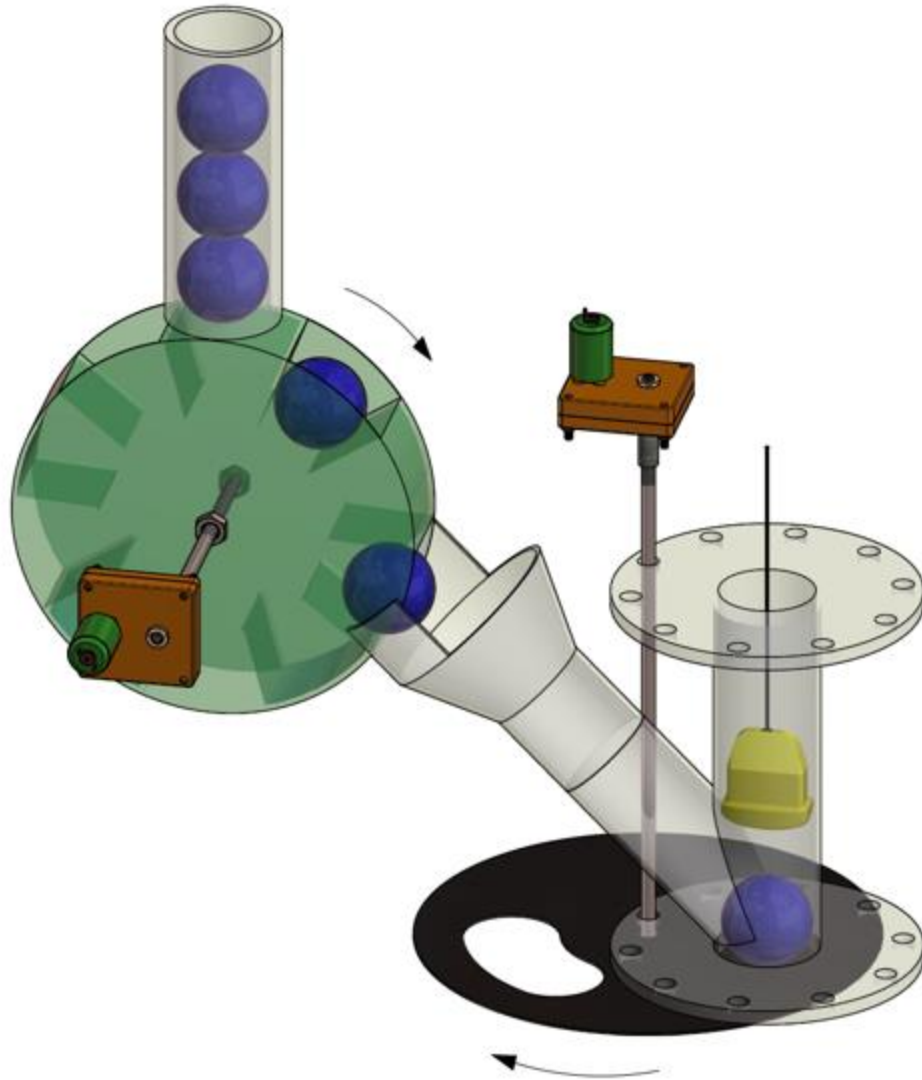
Assembly showing pebble feed wheel, polycarbonate ‘Y’, and rotation disk, along with drive motors
